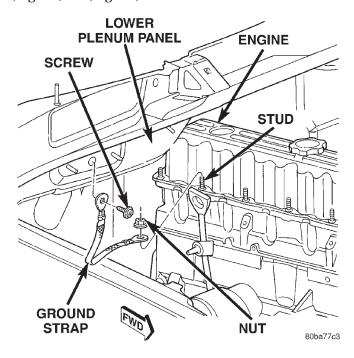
Engine-To-Body Ground Strap Remove/ Install - 4.0L Engine
